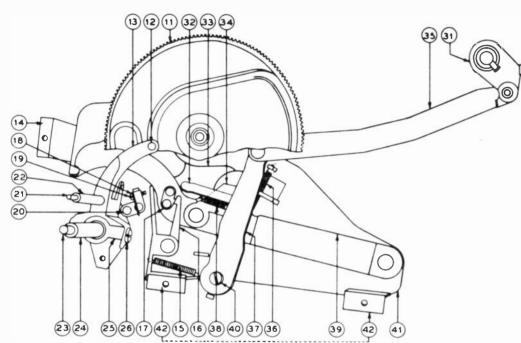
CUTAWAY VIEW SHOWING PARTS UNDER SUB-PLATE ASSEMBLY (83) FIG. 3
